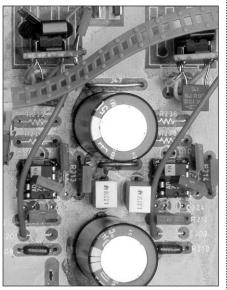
The completed line stage built with Caddock MK132 resistors. R237 and R238 have been soldered to the bottom side of the PC board, allowing easy connection to pins 5 or 6 of the AD744.
